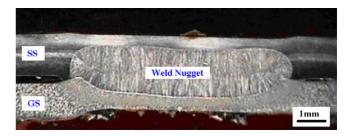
Macrostructure of dissimilar RSW between galvanized steel and stainless steel.
